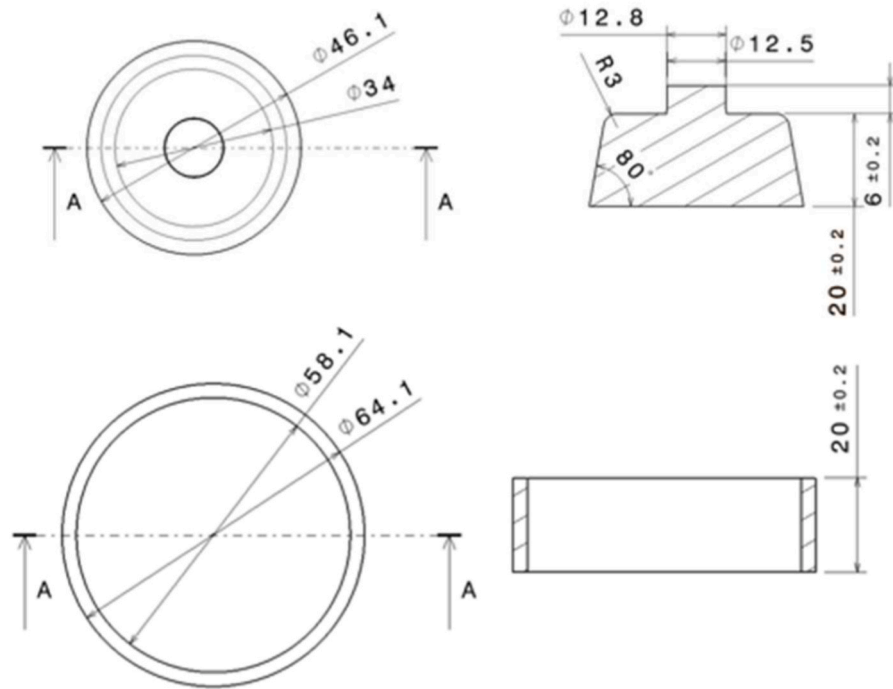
Dimensions (mm) of the tooling component fabricated for axial tests. Lower support (top) and load application cylinder (bottom).
